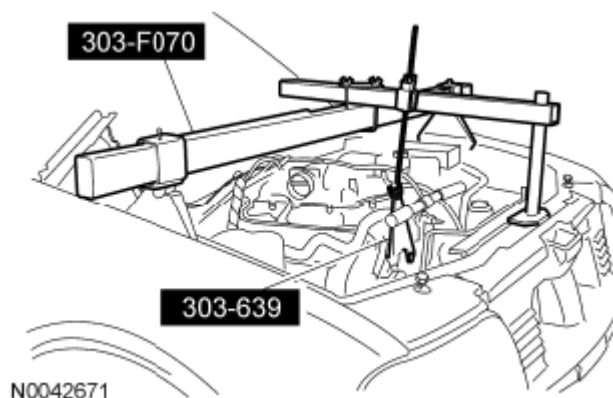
Installing 3-Bar Engine Support And Engine Support Bracket
